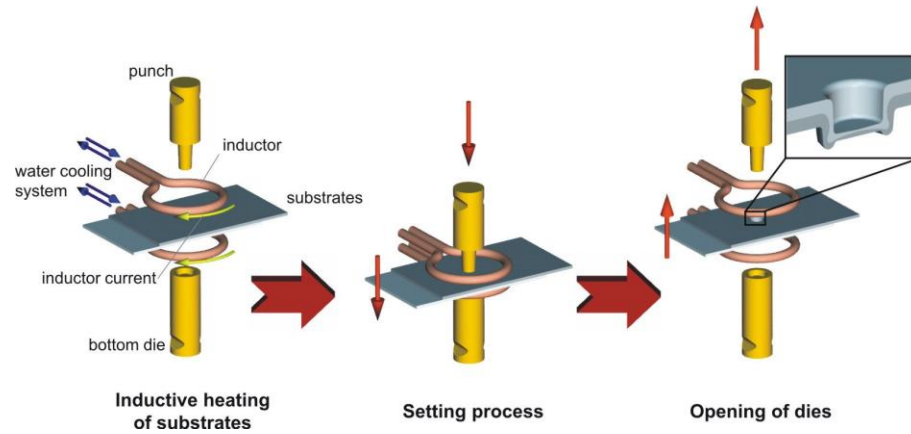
Scheme show clinch joining by using induction heating [27].
